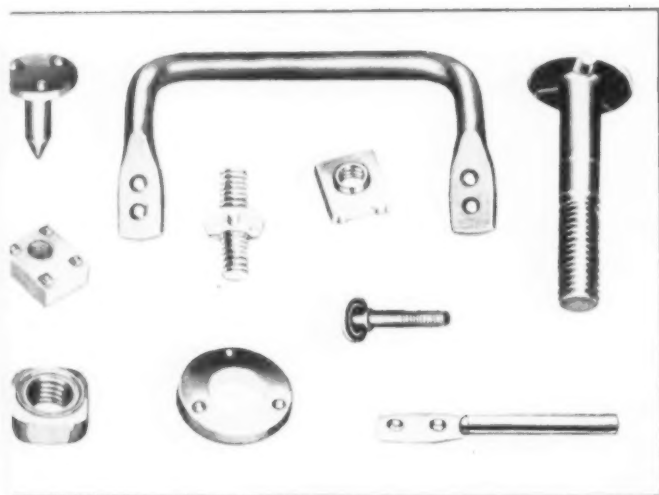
(left) Special parts for projection welding indicate scope of applications. Nut and bolt with annular ring projections are for liquid-tight seals or curved surfaces.
